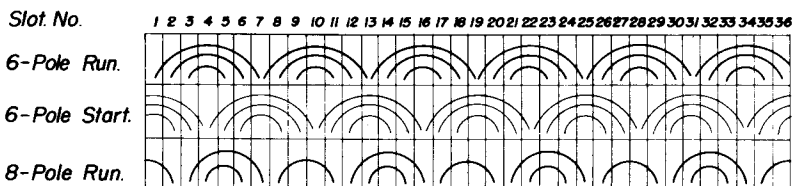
A typical layout of coils in a two-speed capacitor-start motor.
